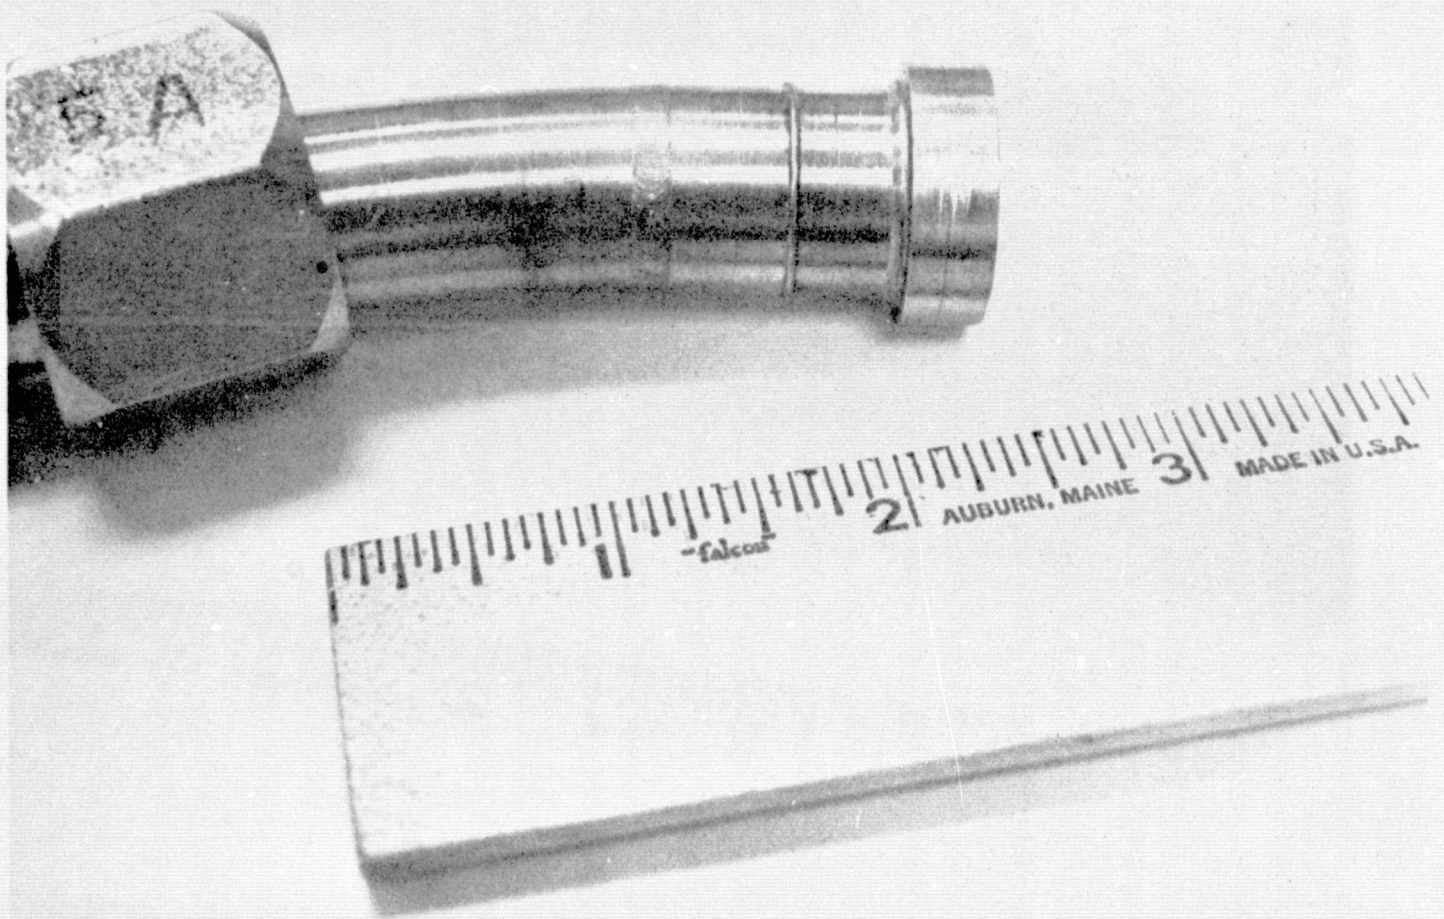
Close up View of the Weld in 3/4 Inch Size Tubing
